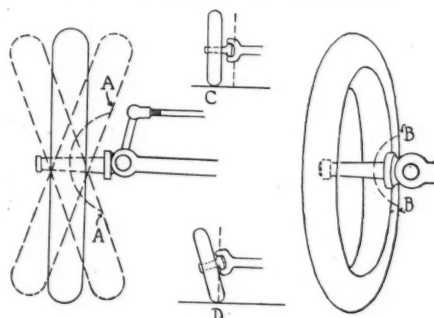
Diagram to illustrate why front wheels of motor car are inclined. The circle A-A is greater than B-B, as in the former case the wheels are not inclined
